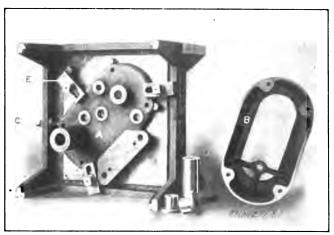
Drill Jig shown in Fig. 75 with Work in Place
